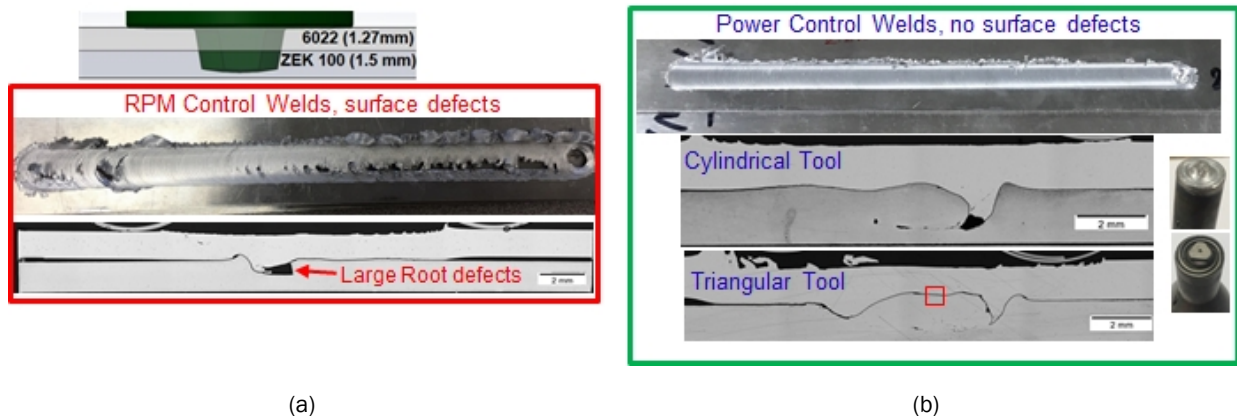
(a) Sheet, weld, and pin geometries at upper left and weld surface and cross-section with speed control at lower left. (b) Power control welds with cylindrical and triangular pin geometries. Source: PNNL.
